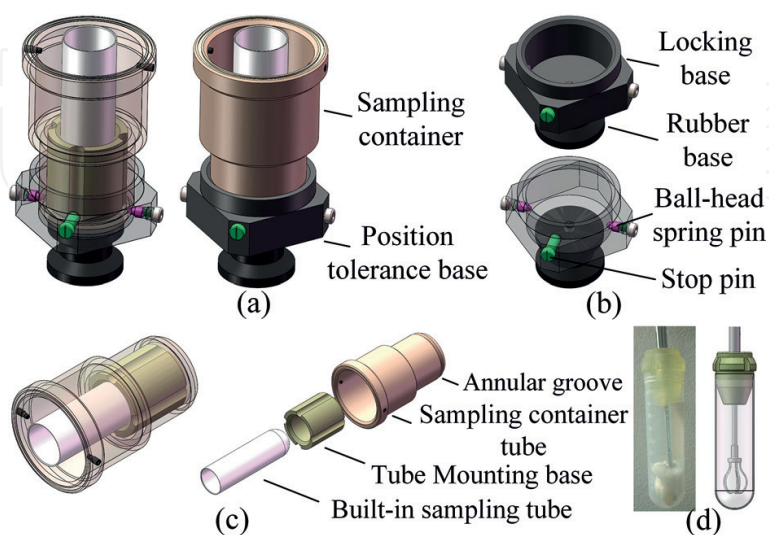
The sampling container and mounting base: (a) sampling container and mounting base, (b) position tolerance base, (c) the components of the sampling container, (d) built-in sealed sampling tube.
